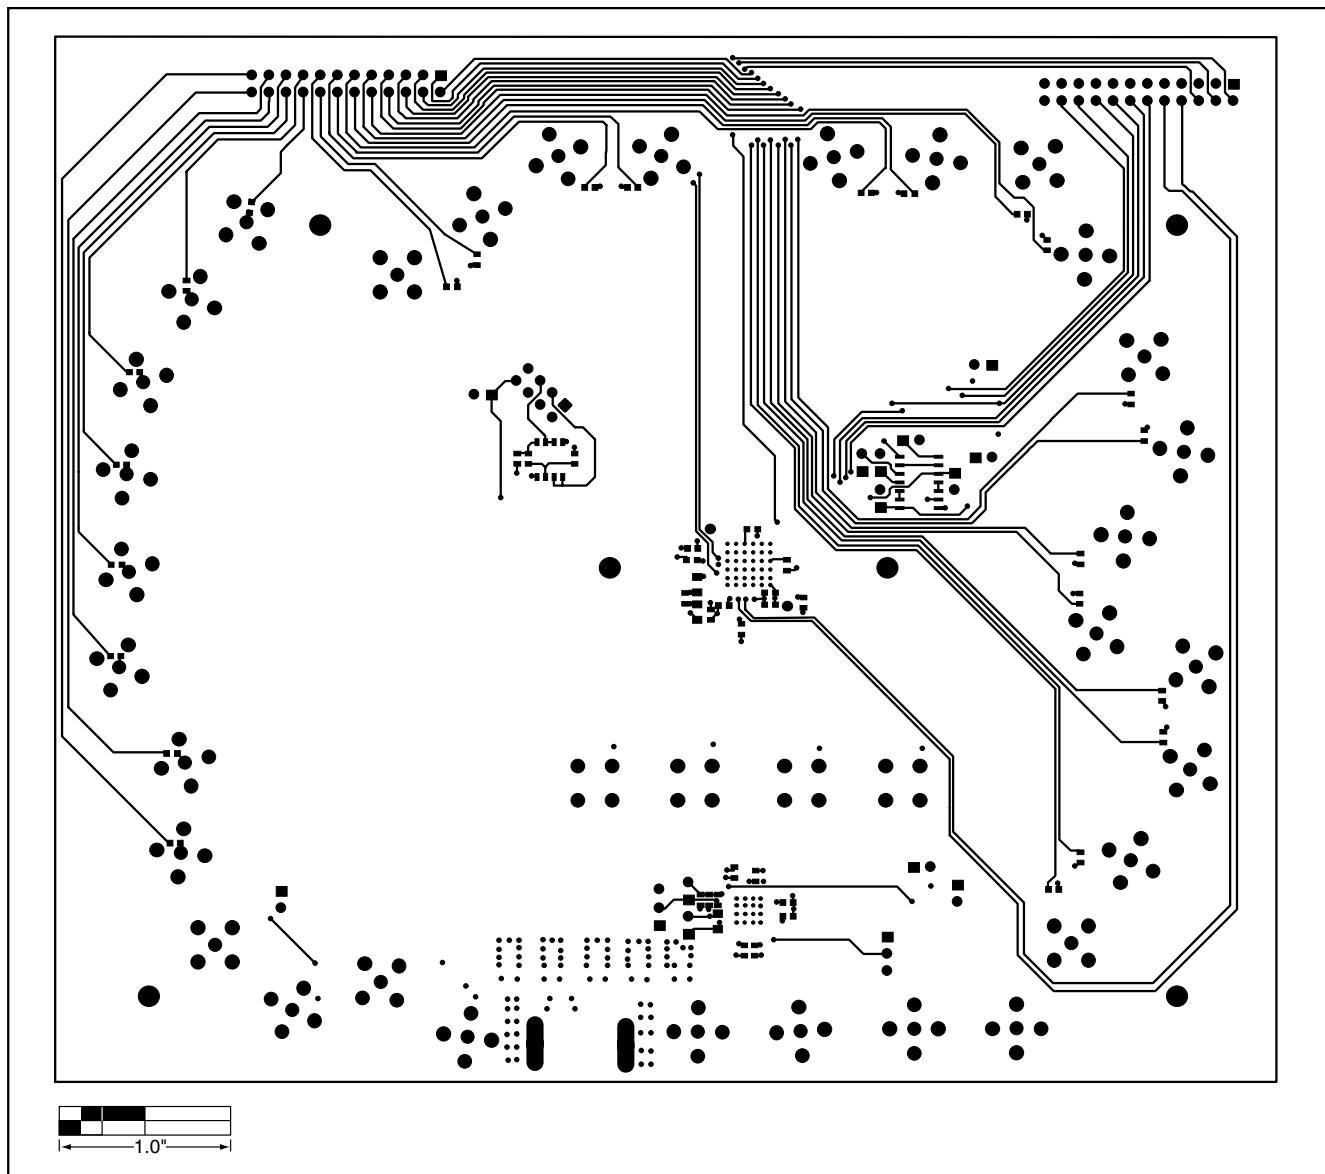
MAX3831/MAX3832 EV Kits PC Board Layout—Solder Side
